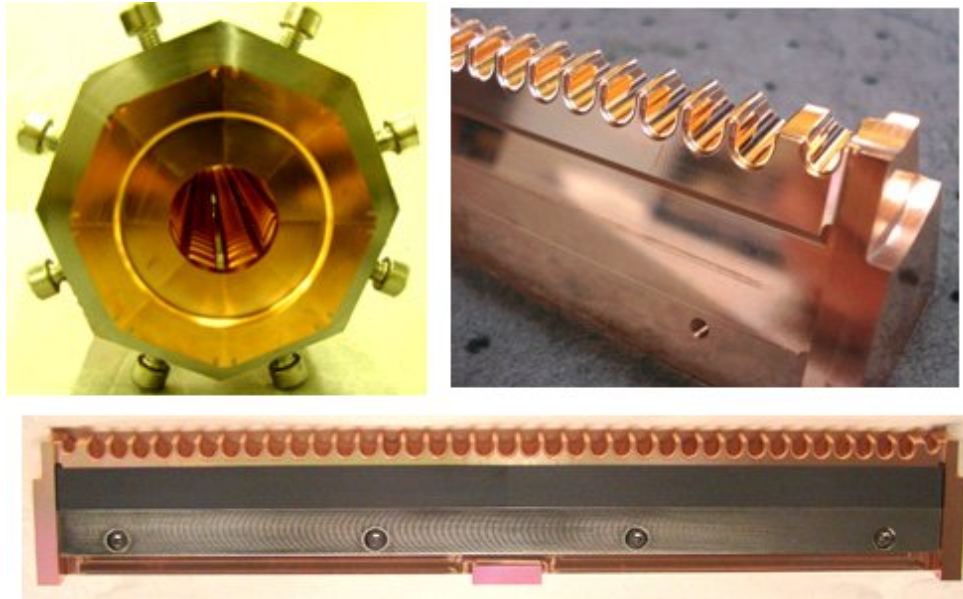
The front view of the pre-assembled PETS body (top left), zoom of the PETS single bar (top right) and view of the single bar equipped with damping loads (bottom)
